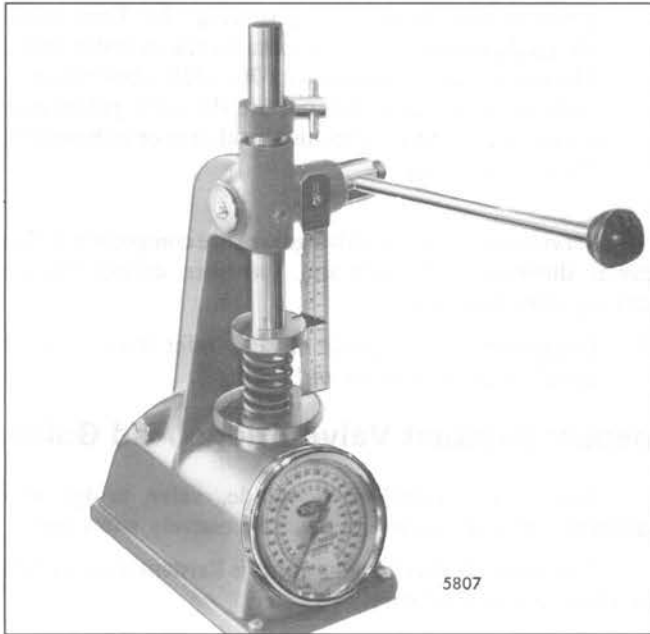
Testing Exhaust Valve Spring using Tool J 22738-02
